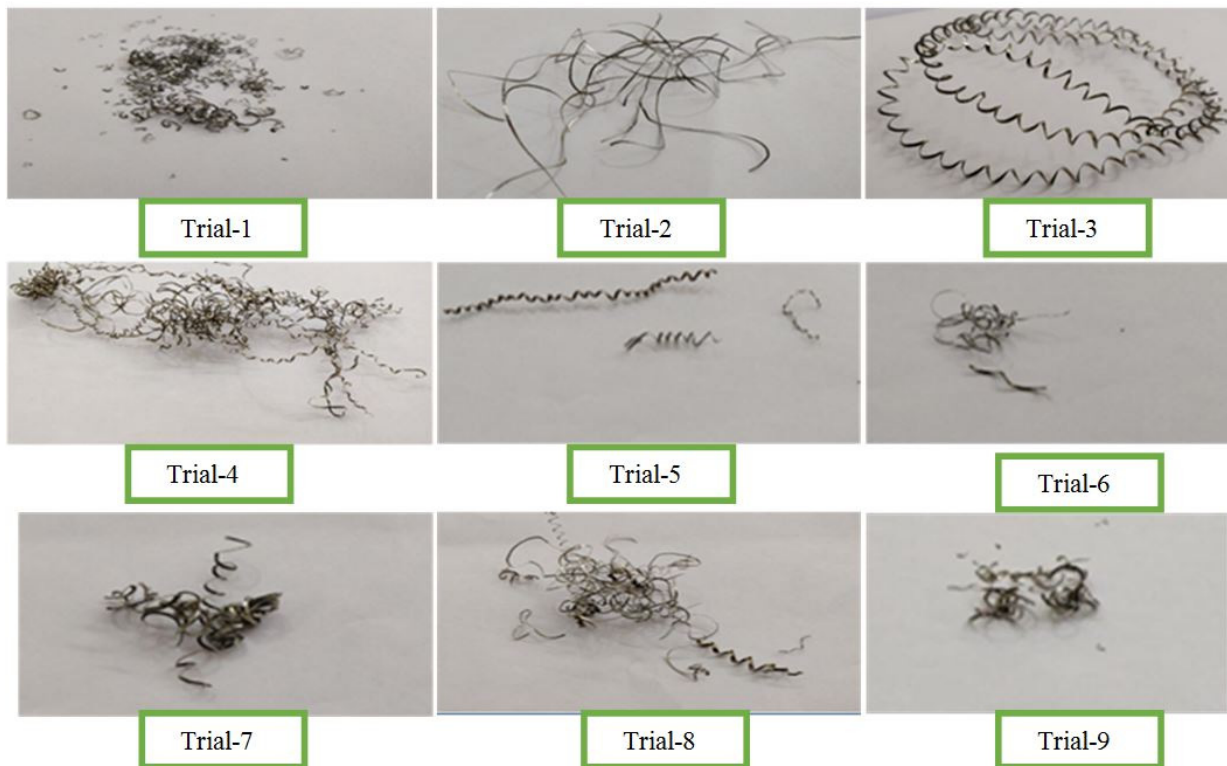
Chip morphology of Tin coated carbide tool after each trial.
